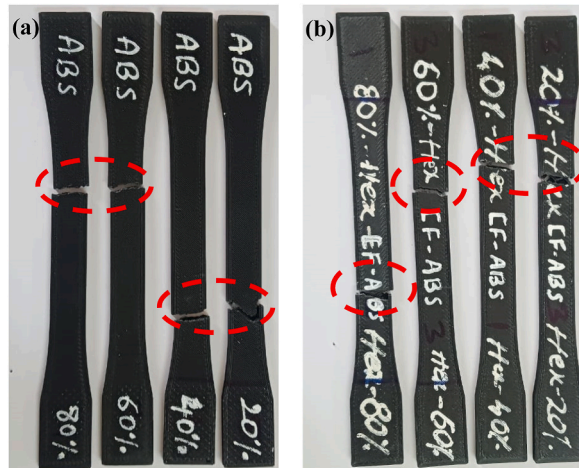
Fractured specimens after performing tensile tests: (a) ABS-20, 40, 60, and 80 %; (b) CF-ABS-20, 40, 60, and 80 %.
